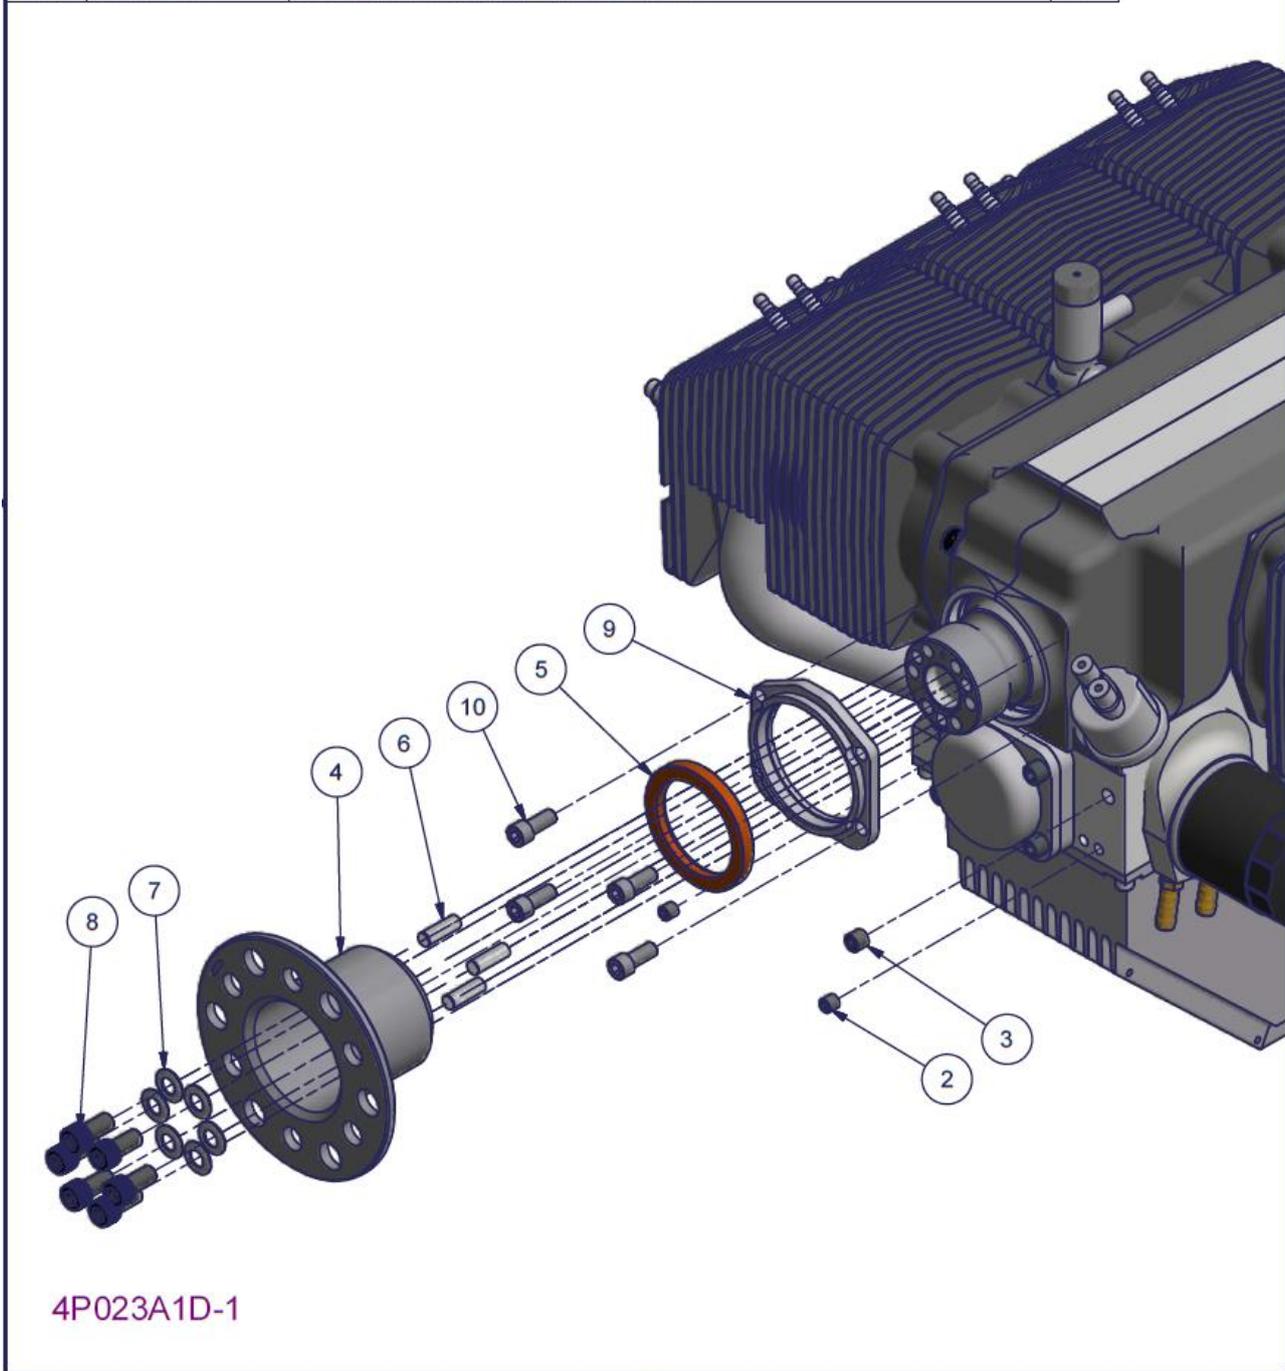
2200/3300 Front seal and propeller flange (separate seal housing) – Parts List
